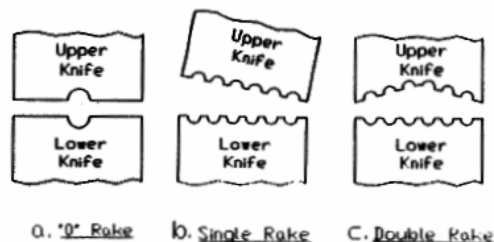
Knife design: a. Zero rake; b. Single rake; c. Double rake.
